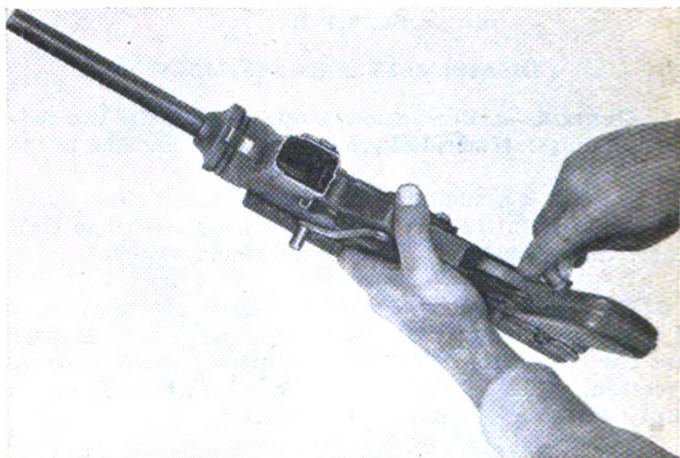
Remove trigger guard by using the rim of a cartridge, a screw driver, or a thin coin to pry the lower end out of its slot in the pistol grip, and withdraw it by rotating down and forward.
